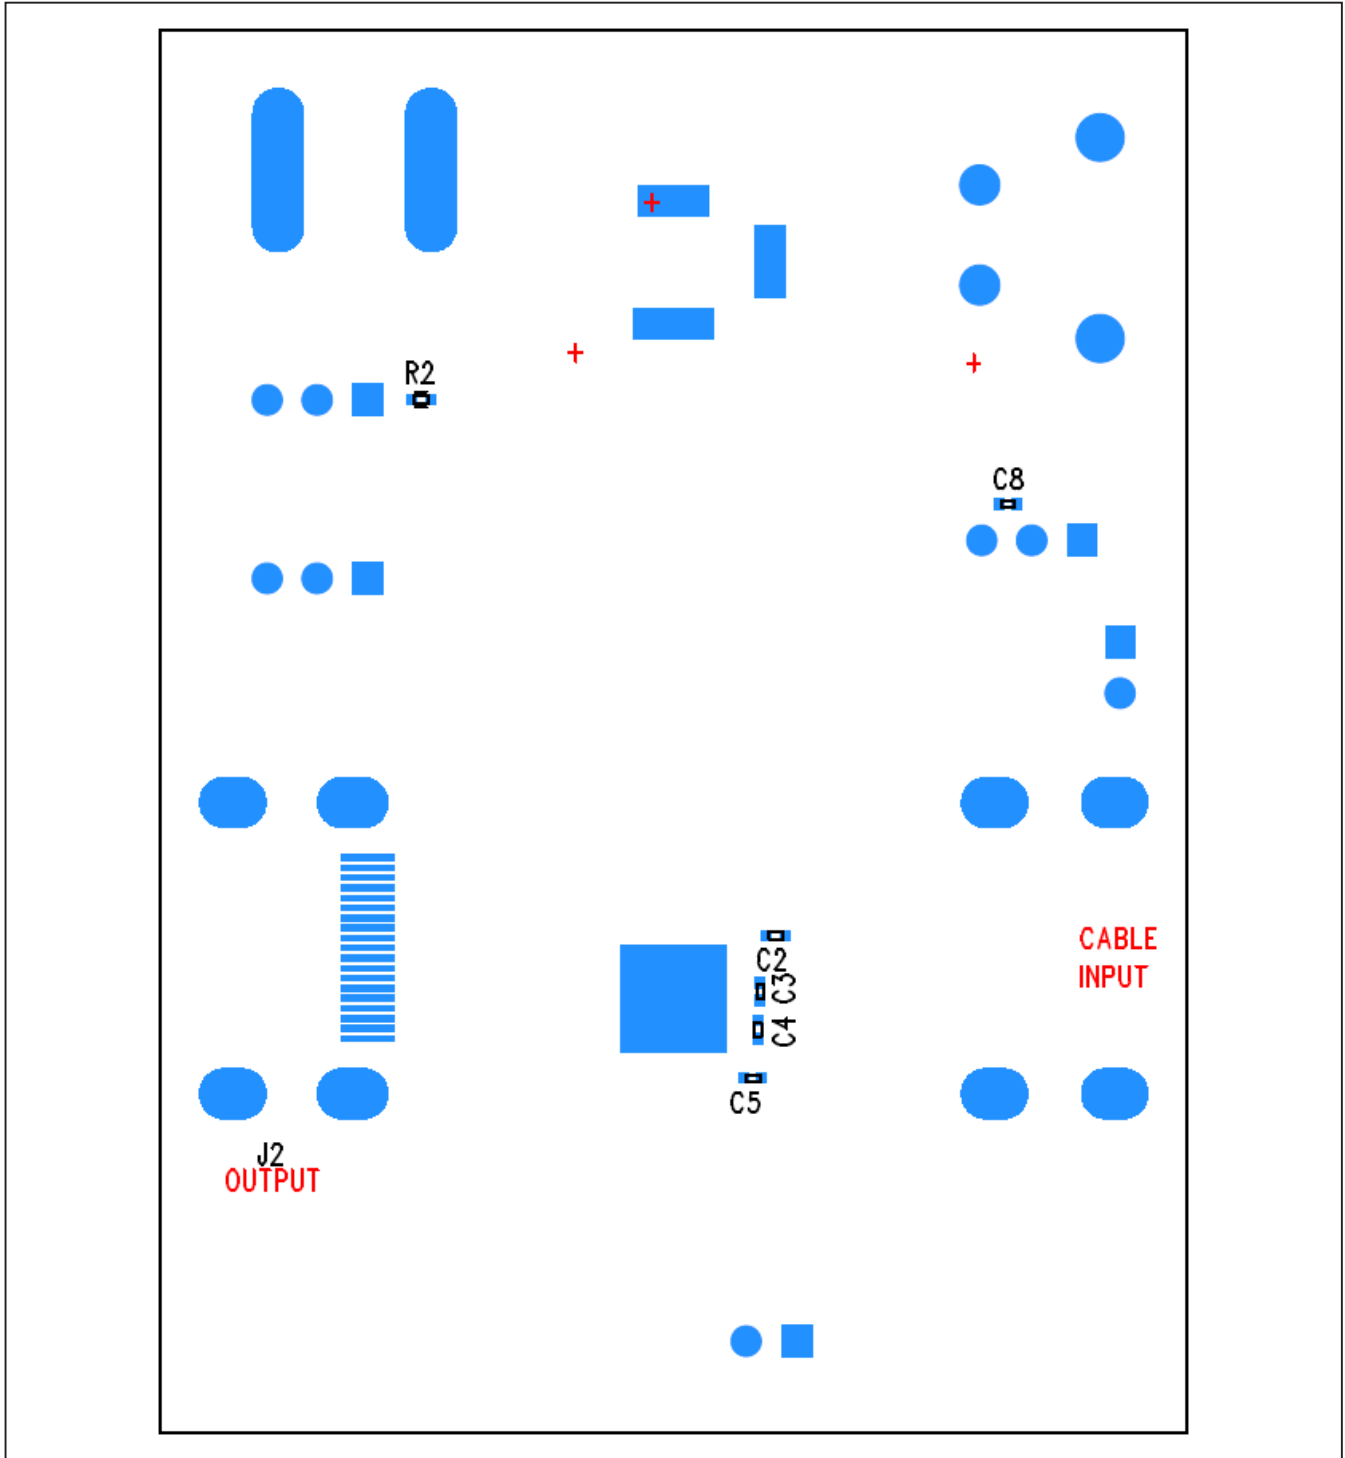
MAX3815A EV Kit Component Placement Guide—Solder Side
